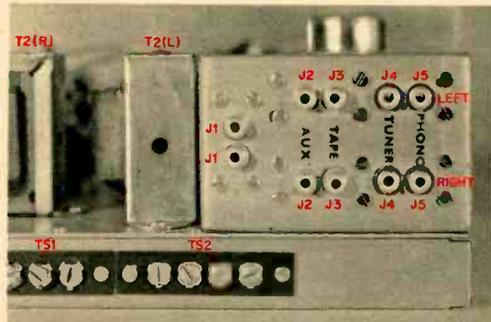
Jacks mount in metal enclosure at rear of chassis. Drill all holes before bending the metal.
